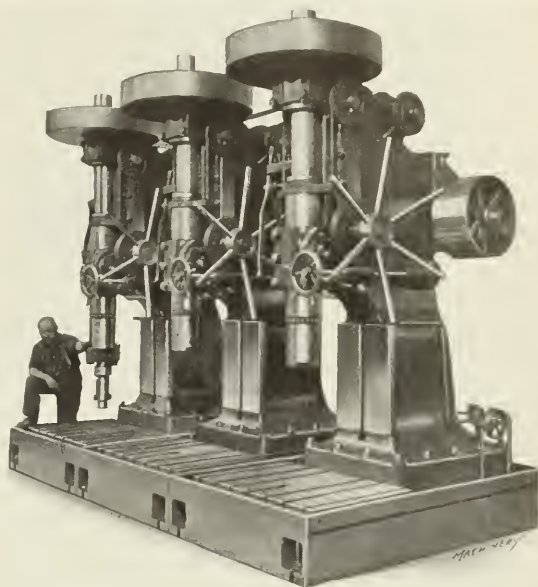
Right-hand Side of Baker Drilling Machine, showing Hand Feed, Feed Trip and Rapid Traverse
